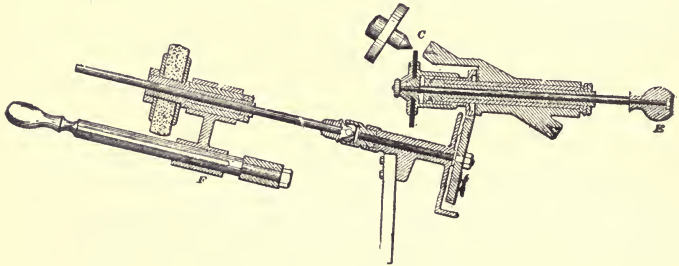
GRINDING LATHE-CENTER SPINDLES.
